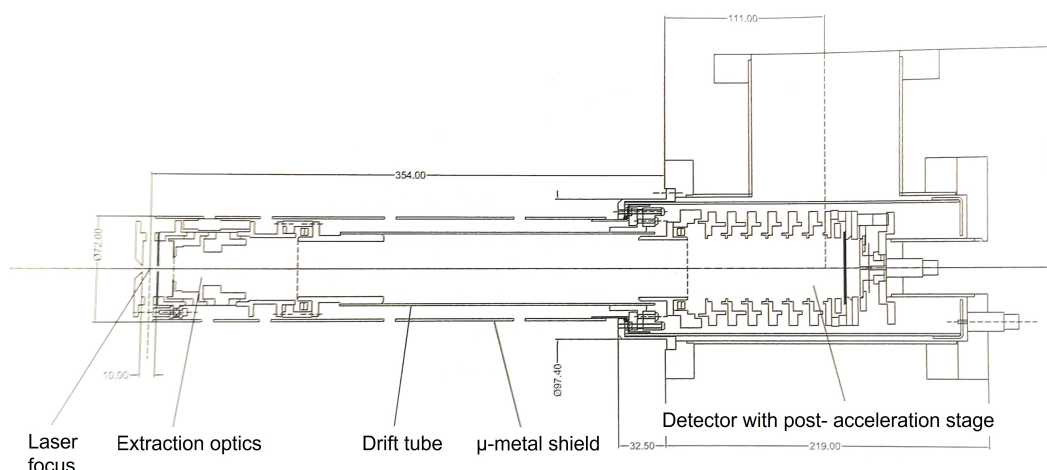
TOF scheme longitudinal section, used in the ELYCHE laboratory
